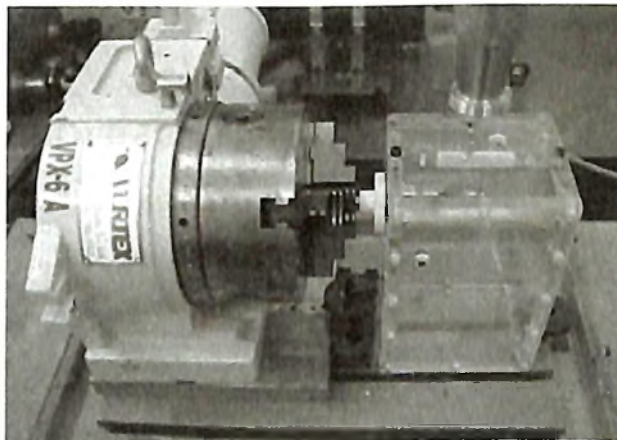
Photograph of welding operation of Ir-192 source container
